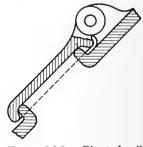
A simple cover held by gravity and requiring no machine work.
